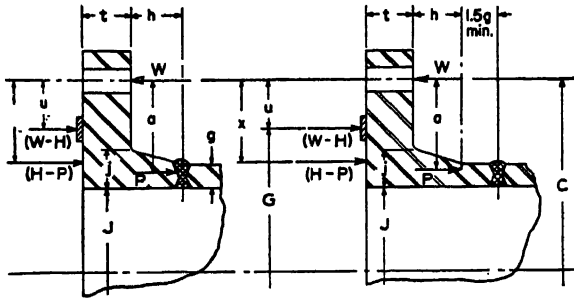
Hubbed or Welding-neck Type Flanged Fittings.
